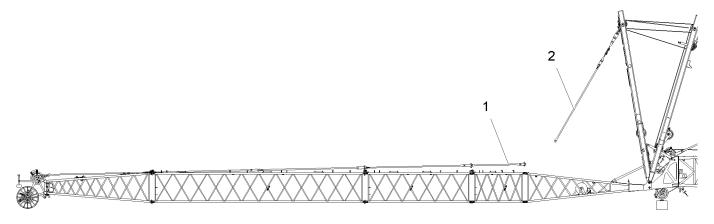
Bolting the equaliser on A-frame 3 to the jib pendant straps
